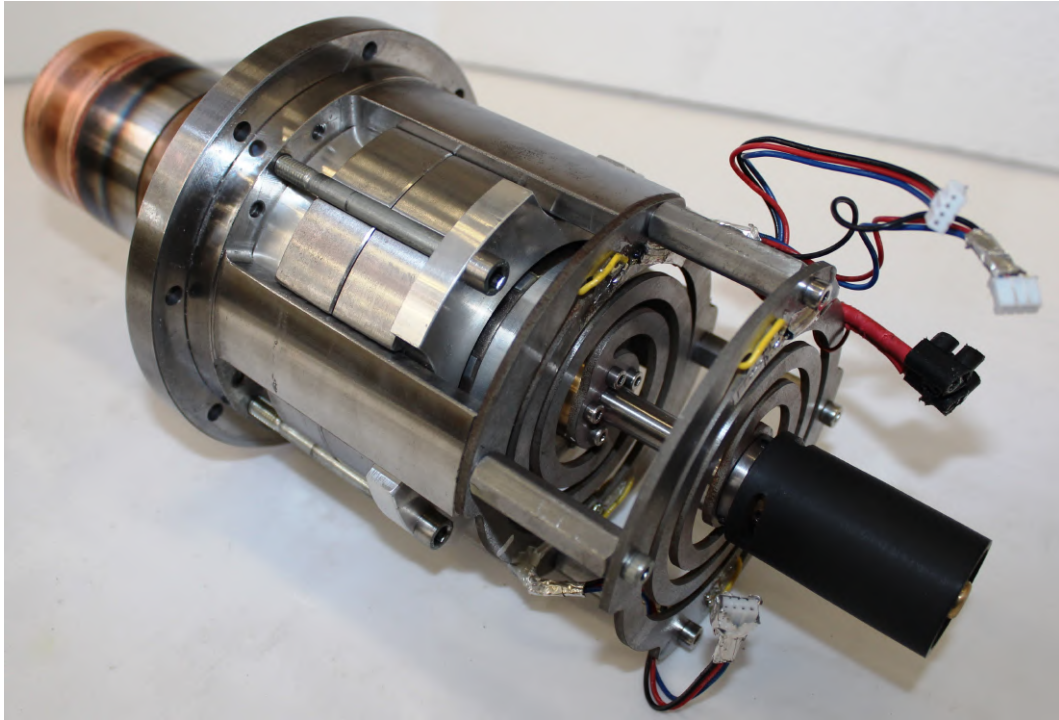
Internal engine assembly, as seen with the removal of the aluminium sleeved body and the displacer motor core
